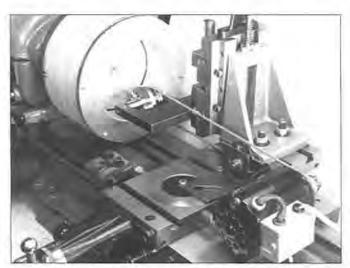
Cutting the internal teeth of the ring wheel using one tooth of a commercial cutter on a cutter frame driven by a sewing machine motor.
